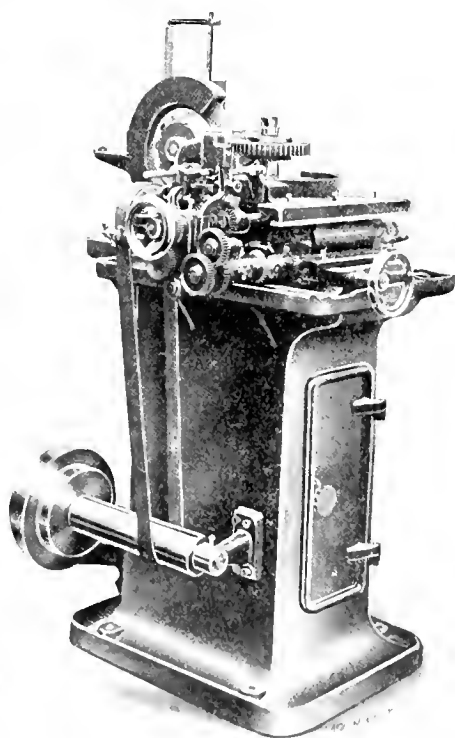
A Machine for Grinding the Teeth of Gears to Accurate Shape after Hardening.
